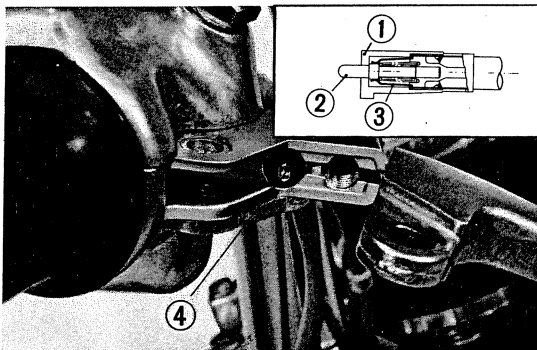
① Switch case ② Shaft ③ Contact plate
